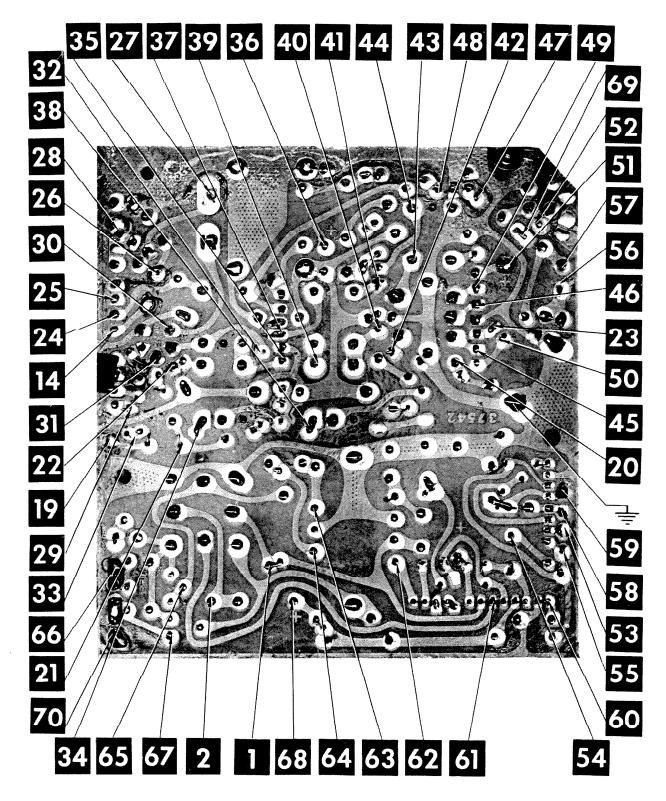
IF Printed Board Bottom View — CircuiTrace Points.
